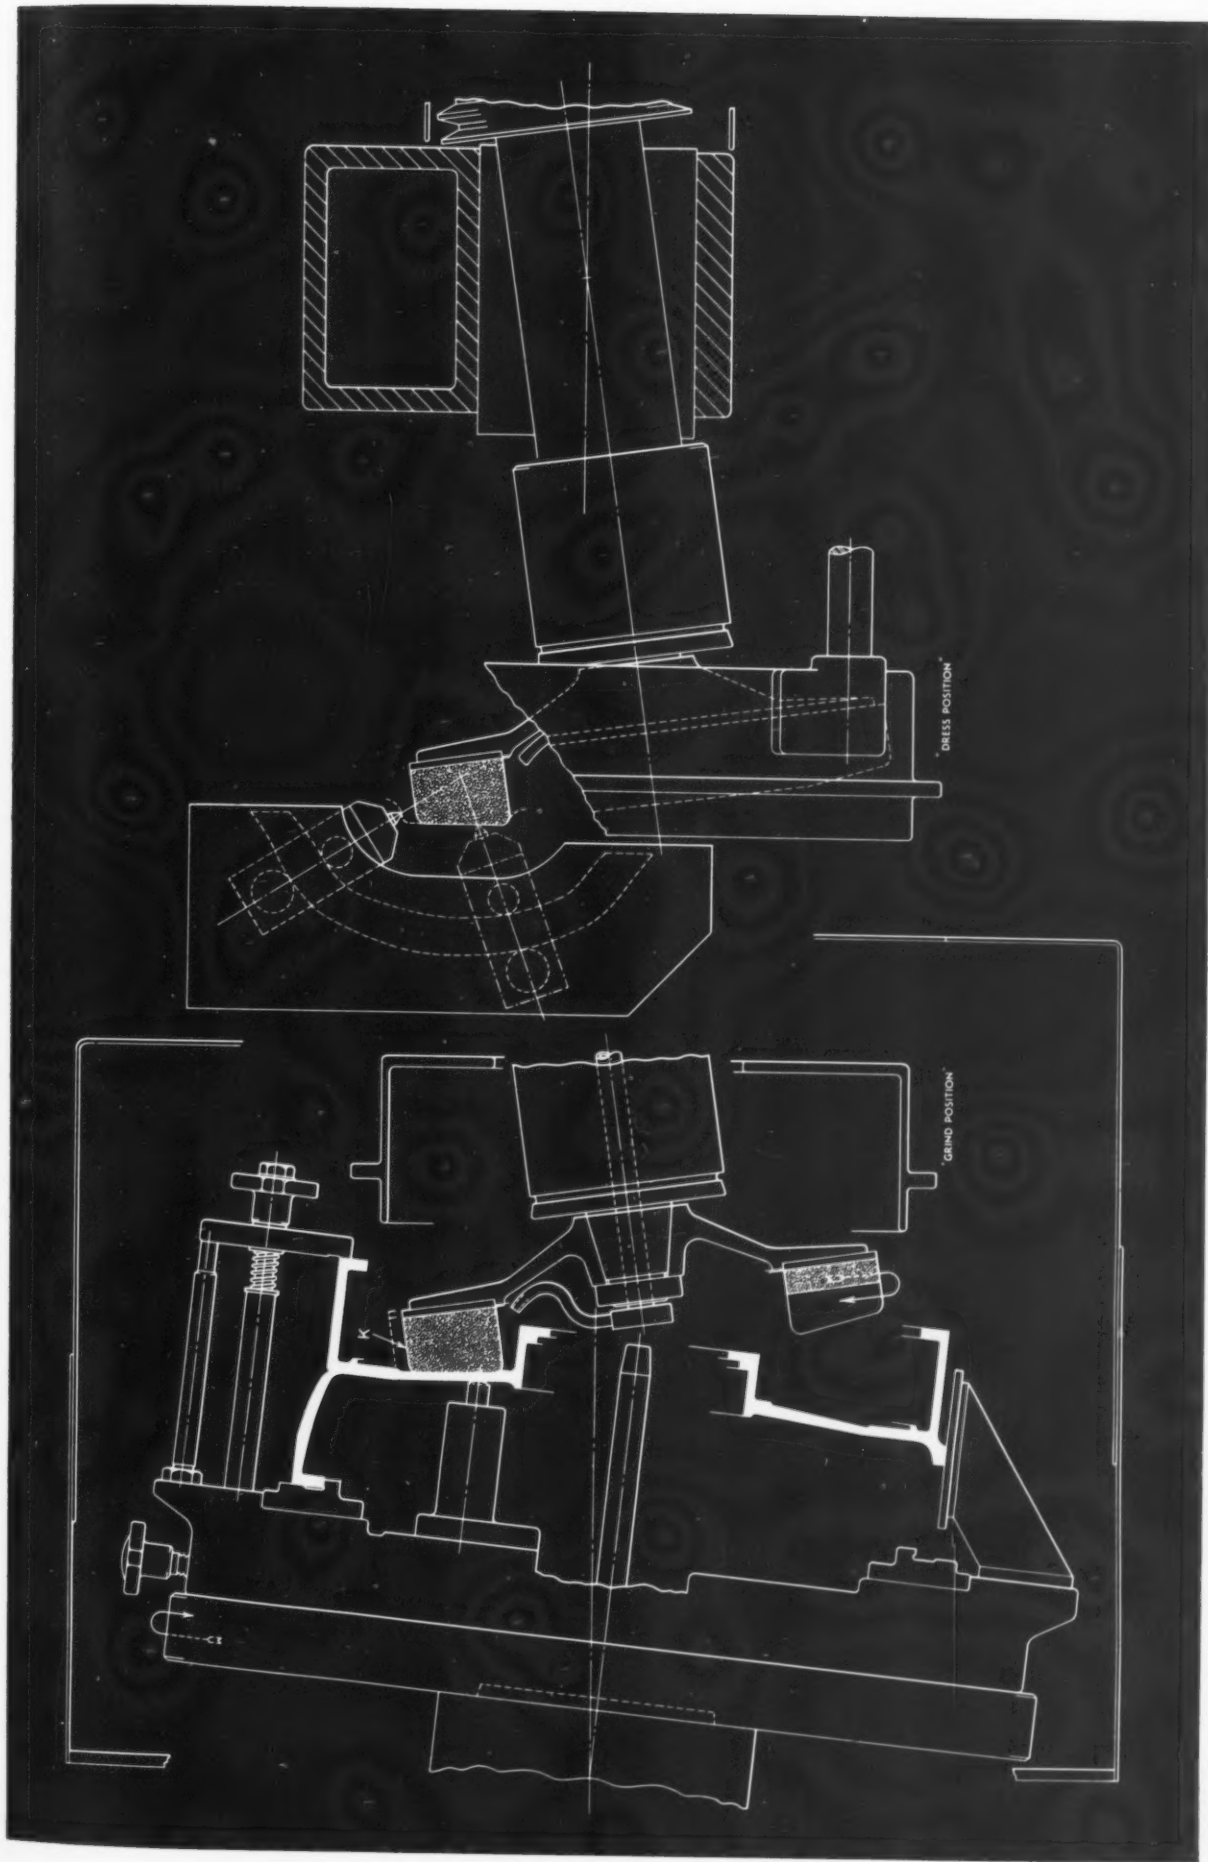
Special Fixture and Wheel-dressing Equipment Used for Finishing Angular Web Face of Steel Crankcase Section
